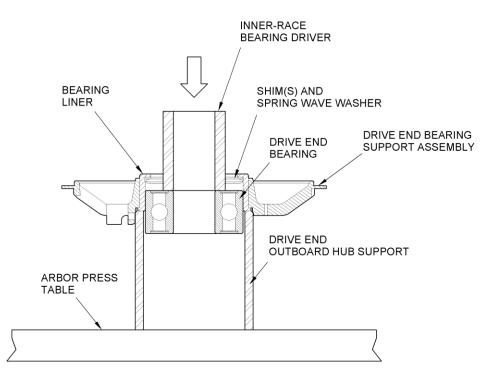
Removing the Bearing from the Drive End Bearing Support Assembly (Pre-Load)
